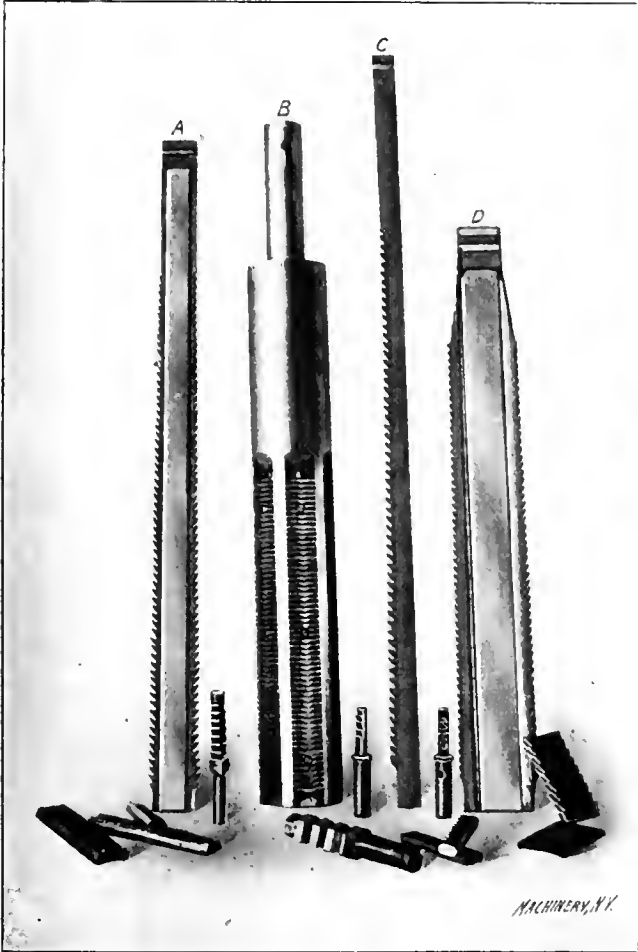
Some of the Broaches used for Broaching Motor Parts.
